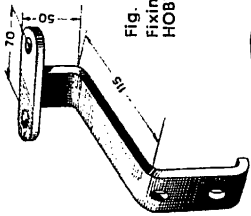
Fixing Bracket HOBE 17 G 1 Z
